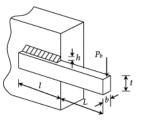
Schematic view of welded beam design problem case A [49].
